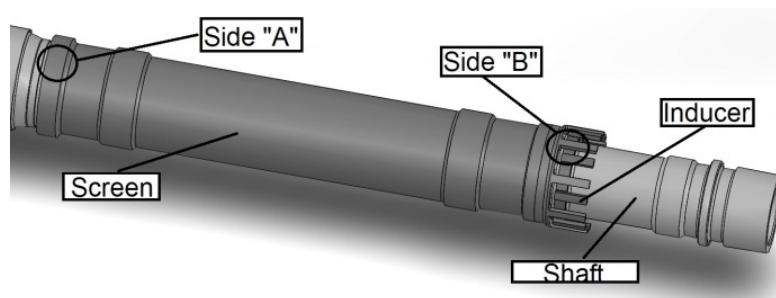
3D model of torque measurement unit, which will next be used in the study
